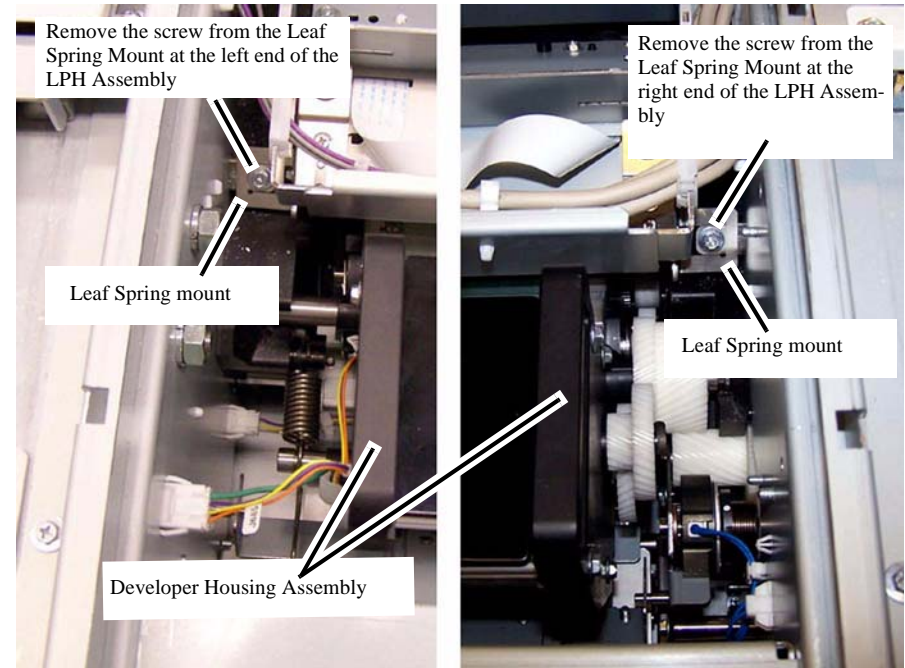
LPH Assembly retaining screws and Leaf Spring Mounts
